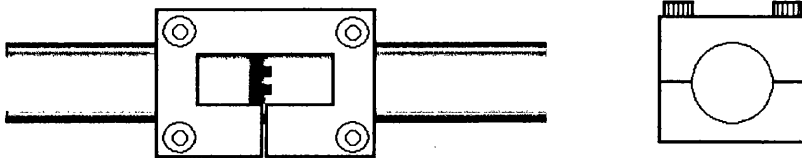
A schematic illustration of the alignment jig assembly.
